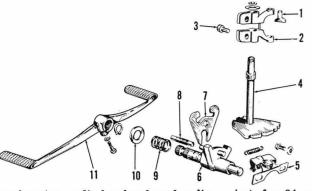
Exploded view of Ducati shifter assembly used on small displacement models.
